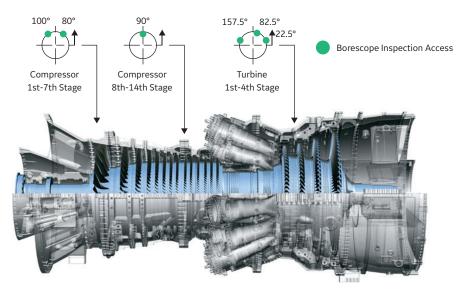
7HA.01 gas turbine borescope inspection access locations
